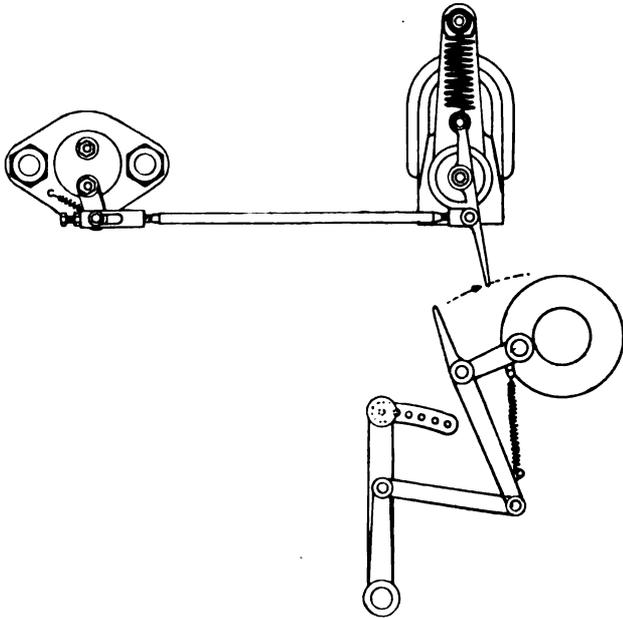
Magneto mechanism, D. Stewart & Co.
